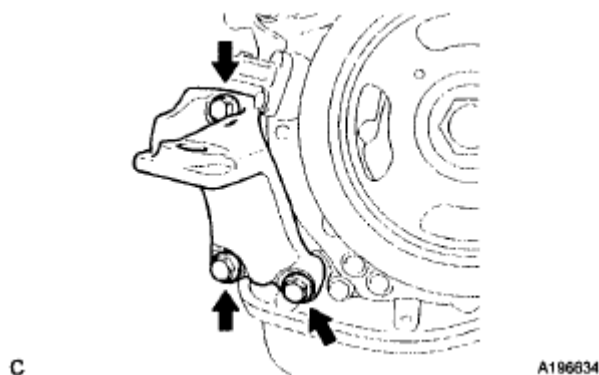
Locating Engine Mounting Bracket RH Bolts
